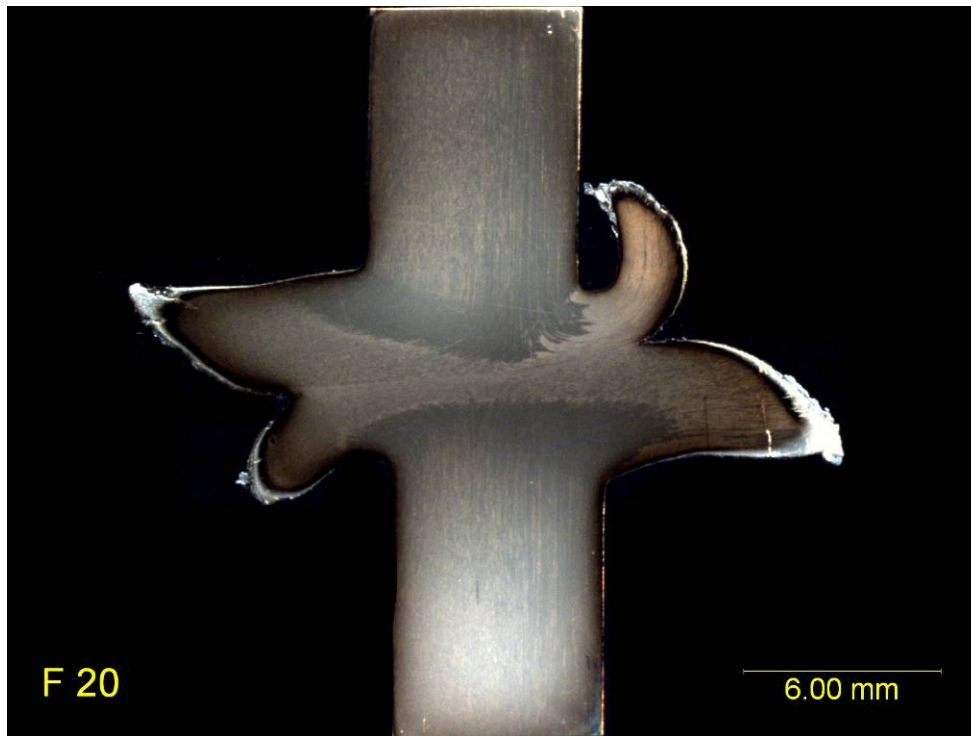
Post Weld Recrystallized Flash Butt Welded Non Recrystallized MA956 Joint
